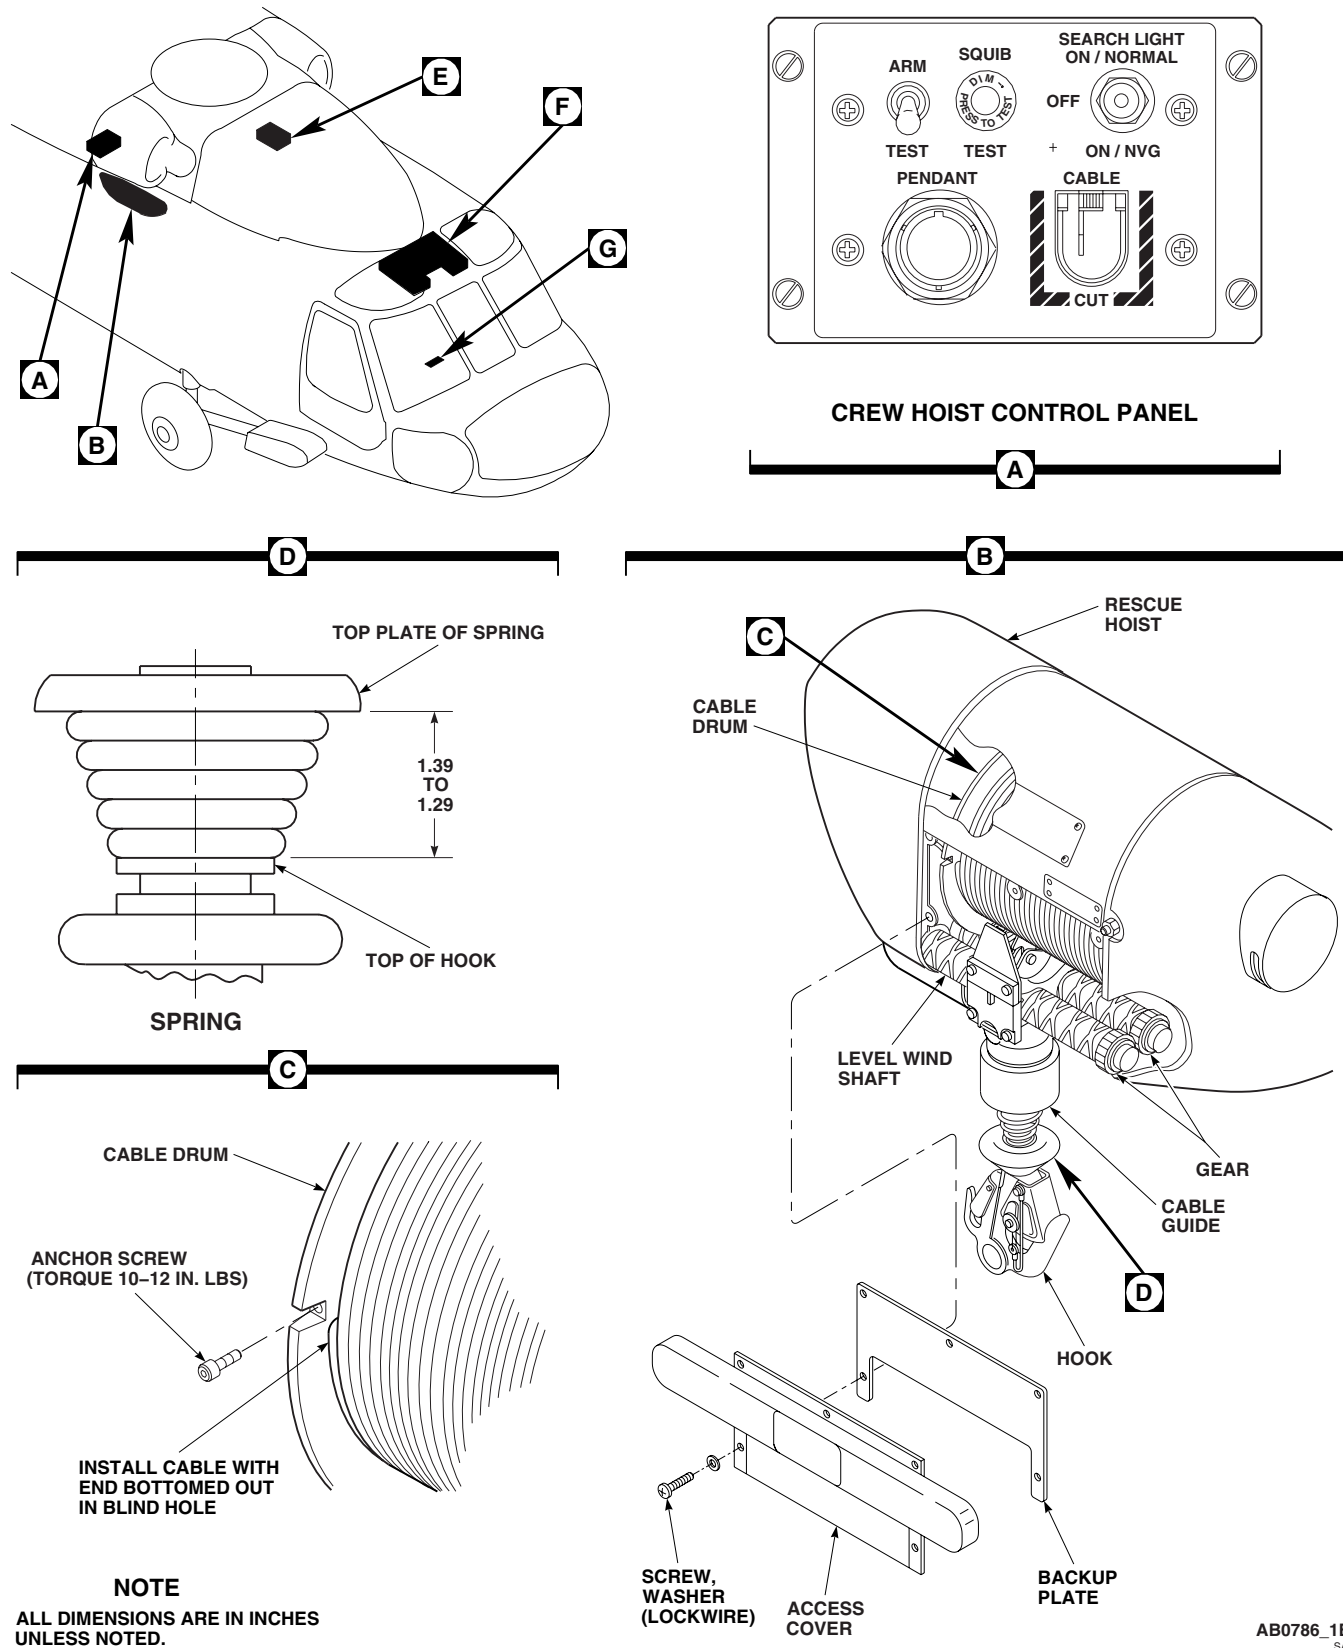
Replace Load Cable. (Sheet 1 of 2)
